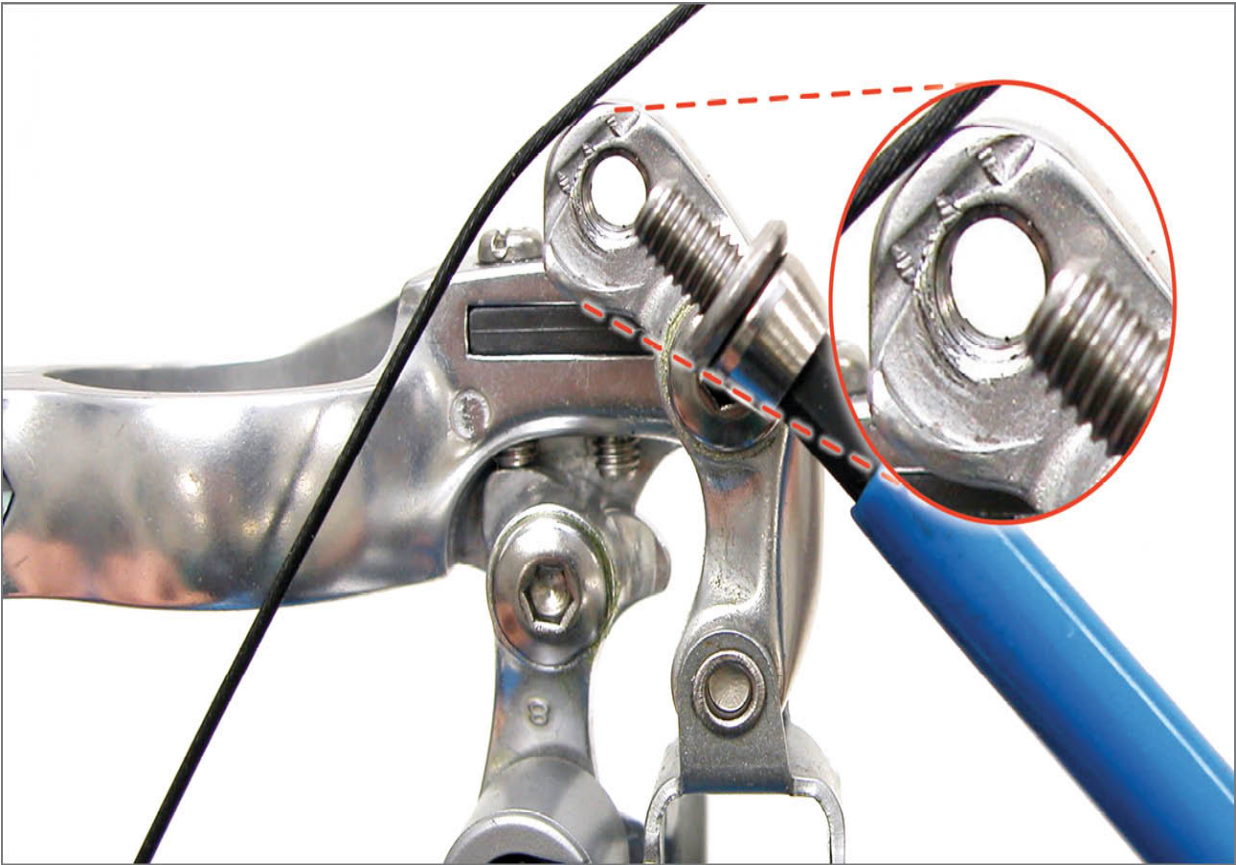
Derailleur cable routing through groove under cable fixing washer
